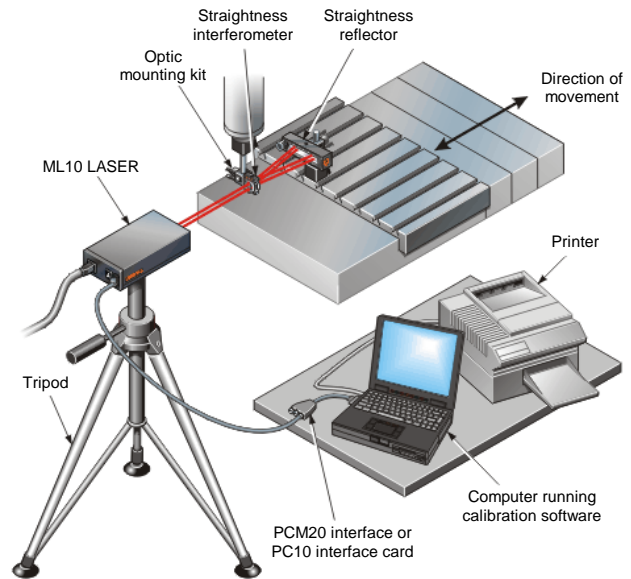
Typical setup for straightness measurement using Renishaw laser system
